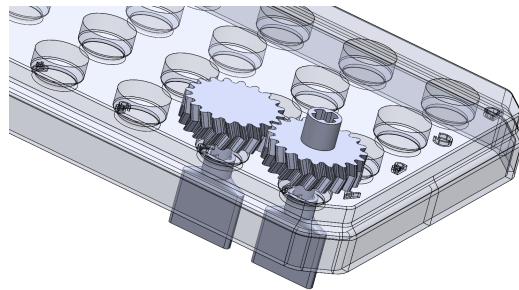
Rendering 3D-printed insert a long with gears connected to rotors that fit in a 24 well titer plate.
